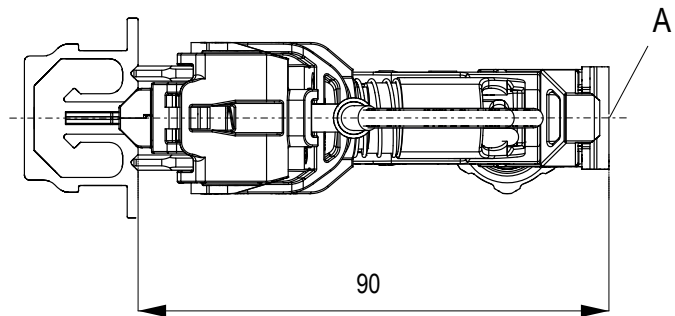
Collector mounting dimension: From towing device to bottom edge of rail
